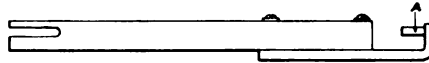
DISTANCE ROD USED IN COMPRESSION TESTS
